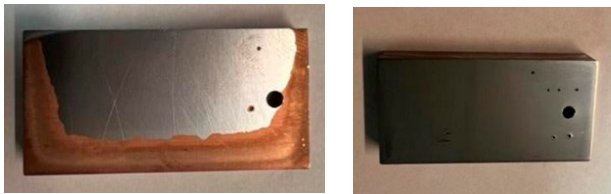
Phygen – CrN PVD coating on a copper plate without the adhesion layer and with the adhesion Layer. The additional of an adhesion layer prior to the PVD coating makes this a viable coating process.
